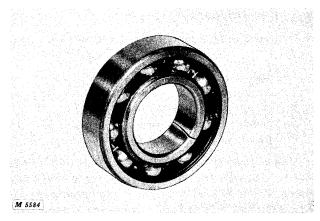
Broken Races Caused by Misaligned Bearing During Installation
